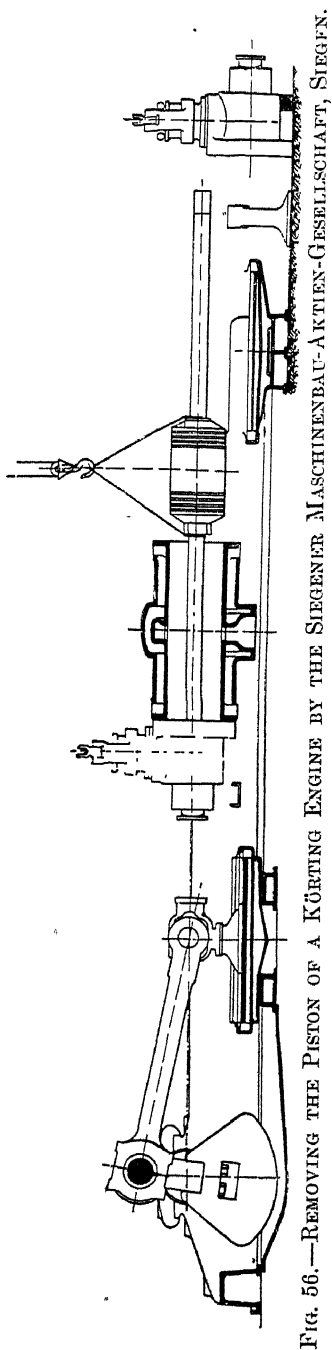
REMOVING THE PISTON OF A KÖRTING ENGINE BY THE SIEGENER MASCHINENBAU-AKTIEN-GESELLSCHAFT, SIEGEN.
